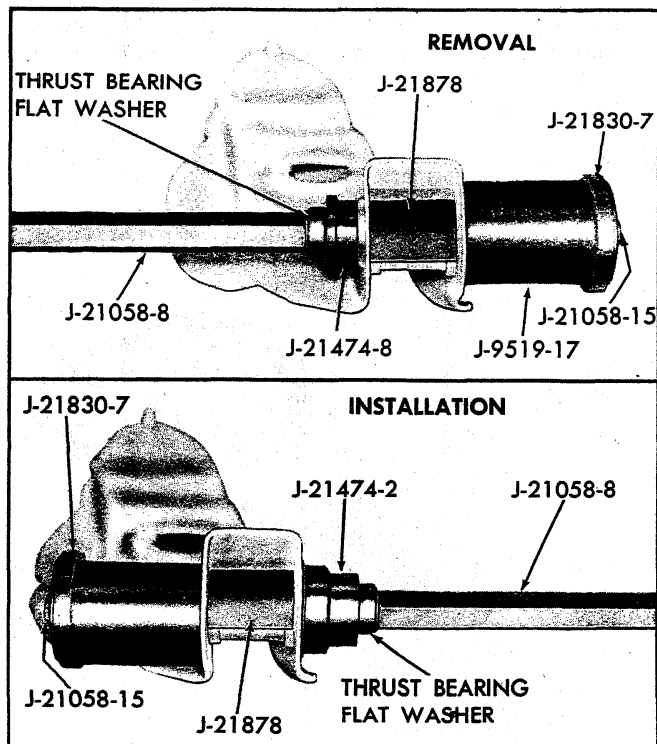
Lower Control Arm Bushing - Chevrolet
